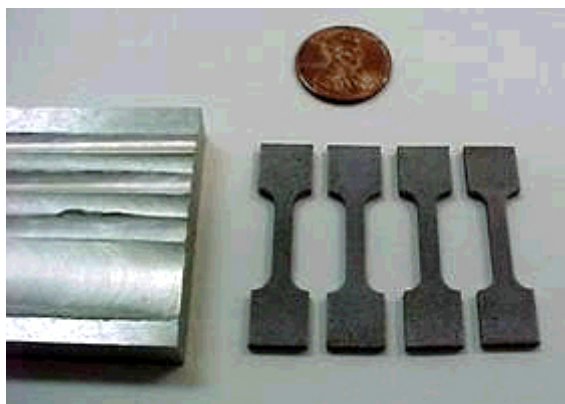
Tensile specimens used for fatigue life testing of FSP aluminum castings.
